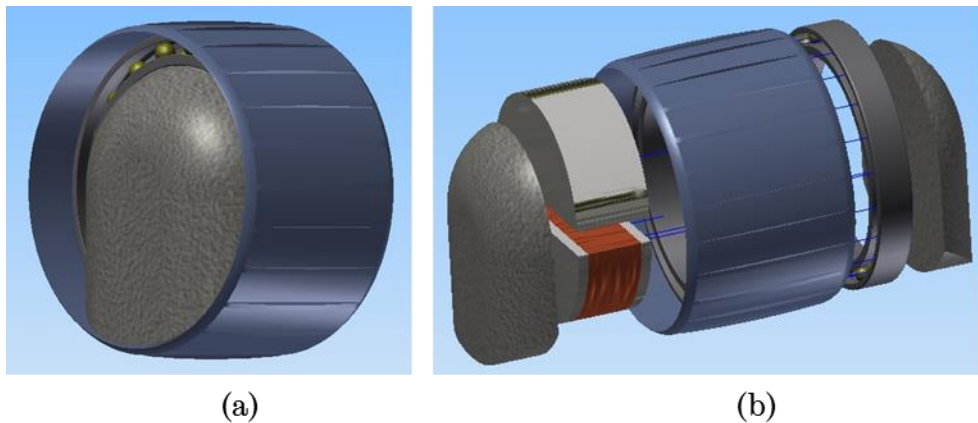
Wheel design with a static EPMAM for manufacturing purposes. (a) Isometric view. (b) Exploded view, for showing the internal components of the EPMAM.
